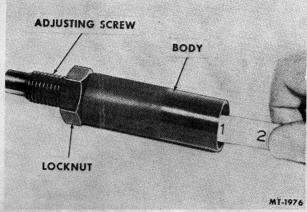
Adjusting Valve Guide Installer for Proper Height
